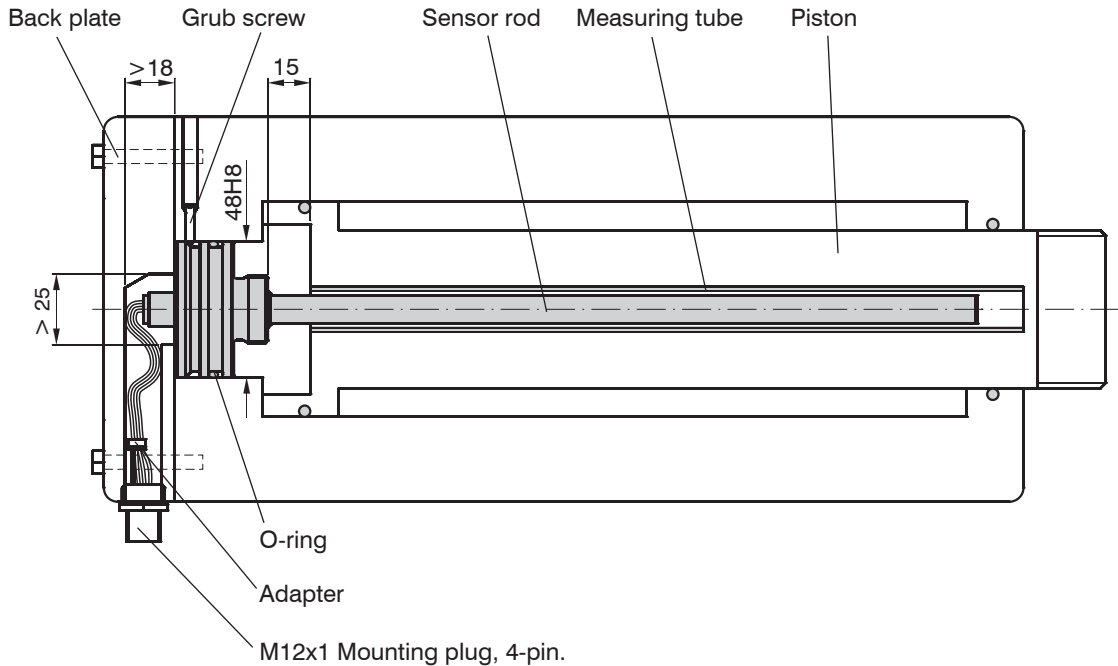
Sensor mounting in a hydraulic cylinder, EDS- ... -Z model
